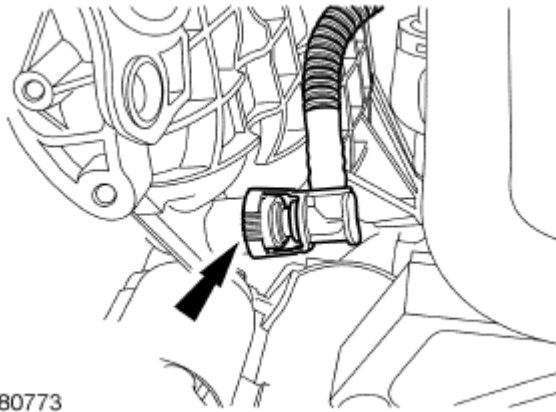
Locating Crankcase Vent Oil Separator Tube
